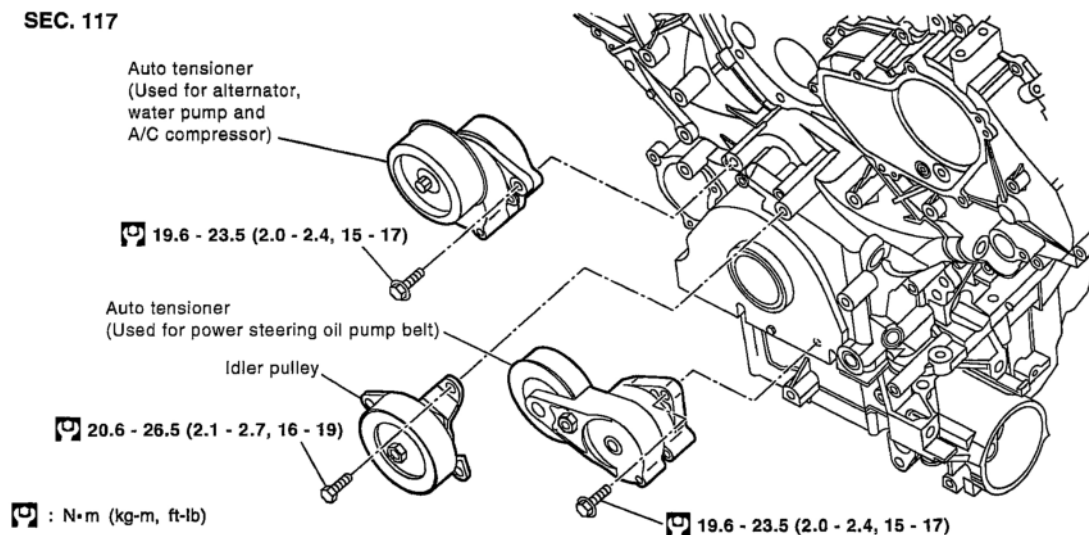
Removing & Installing Drive Belt Auto Tensioners and Idler Pulley
